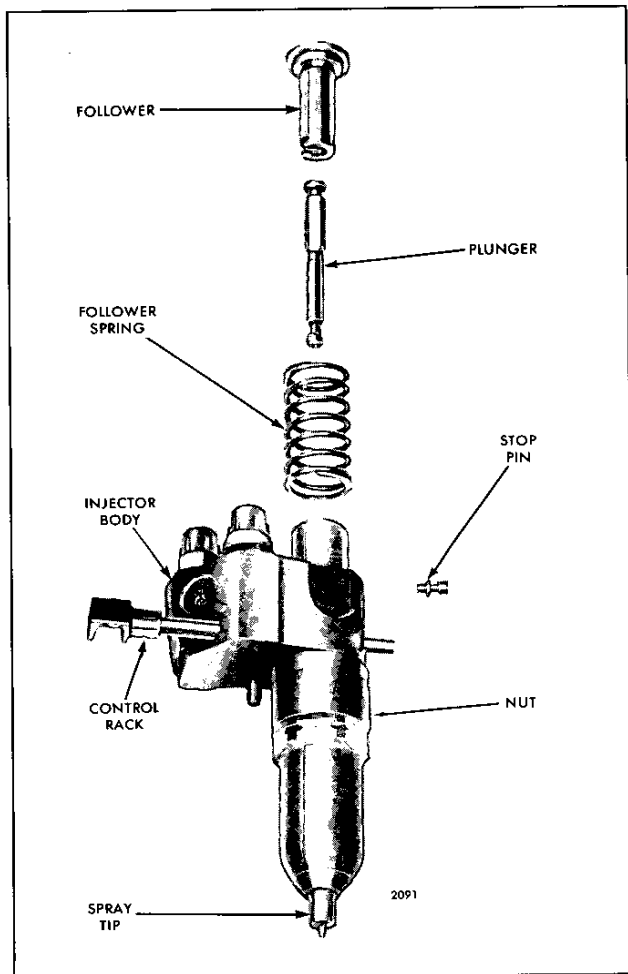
Injector Plunger, Follower and Relative Location of Parts
